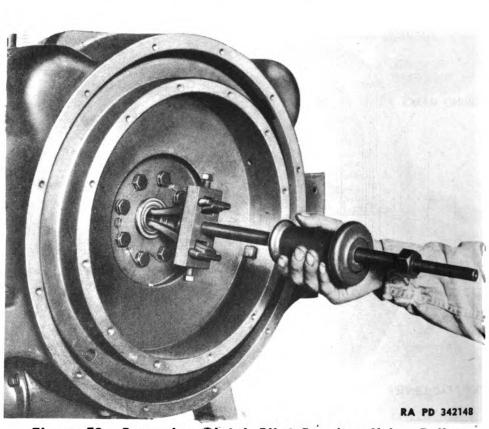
Removing Clutch Pilot Bearing, Using Püller (41-P-2957)
